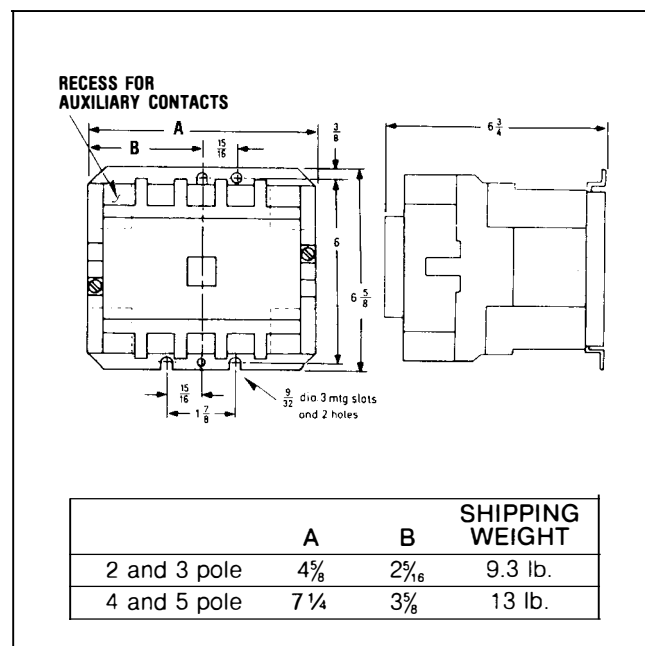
Dimension Drawing, 100 & 200 Ampere
